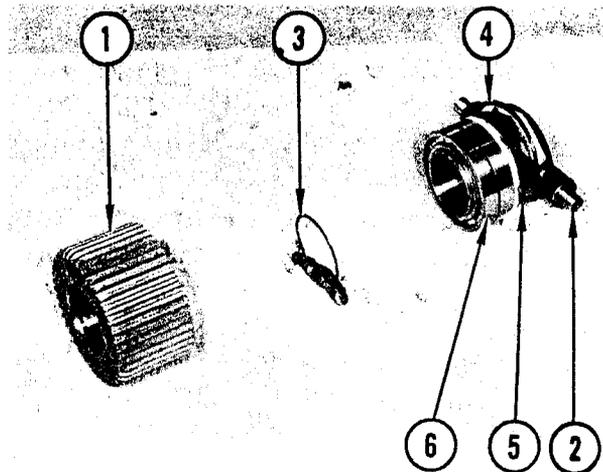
EXPLODED VIEW OF THRUST GEAR
